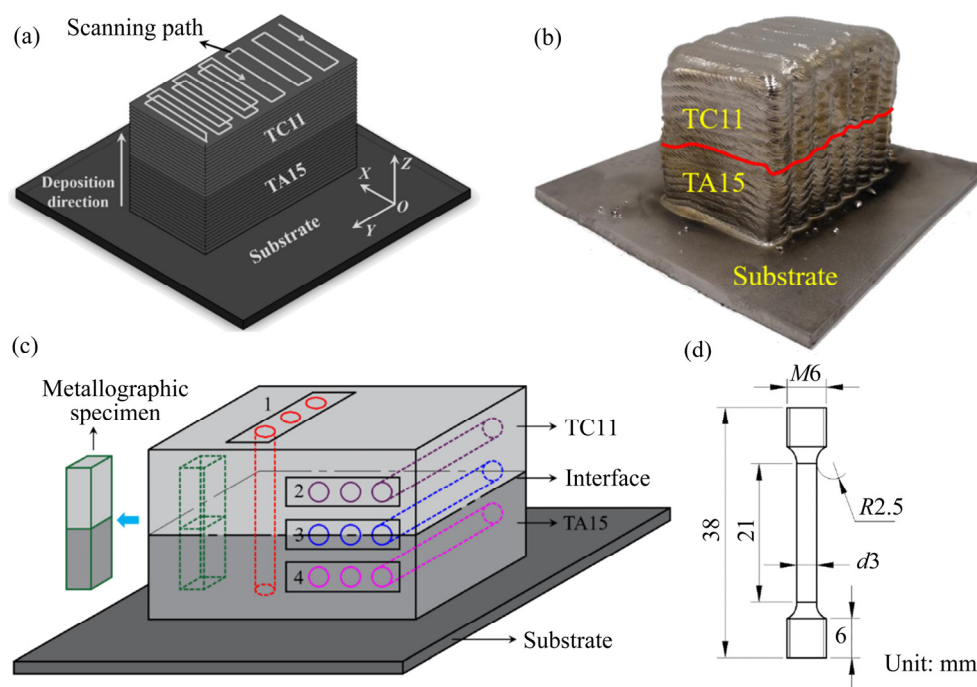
TA15/TC11 GSM: (a) Deposition path; (b) Fabricated block part; (c) Extraction positions of metallographic specimen and tensile specimen; (d) Geometrical sizes of tensile specimen
